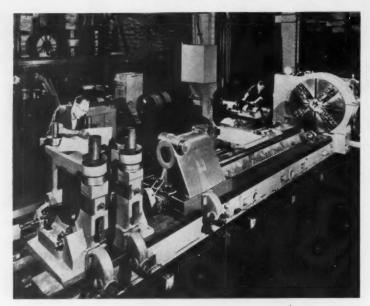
Mackintosh-Hemphill duplicating roll lathe swings work 48 inches in diameter
